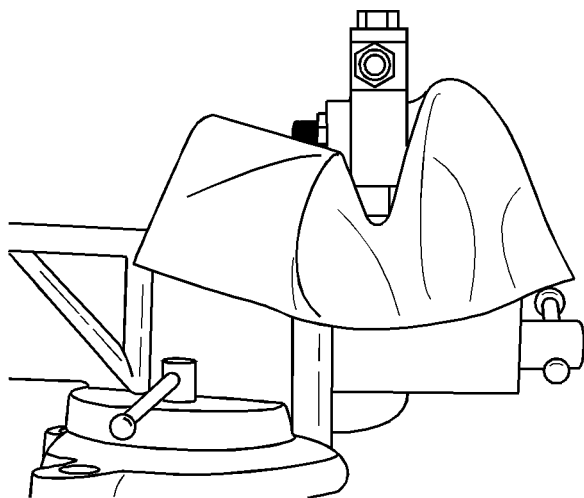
Installing Manifold and Check Valve Assembly in Vise
